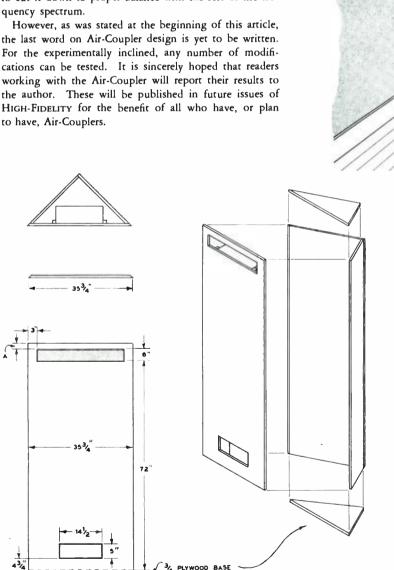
Right: Experimental corner Air-Coupler with all panels in place. For final construction, a solid piece of wood should be used instead of the 3-panel construction shown here. In this way, not only neater appearance but more solid construction is achieved. In the experimental model shown here, the two back panels are 84 ins. long, to permit adjustment of reflex port size.
